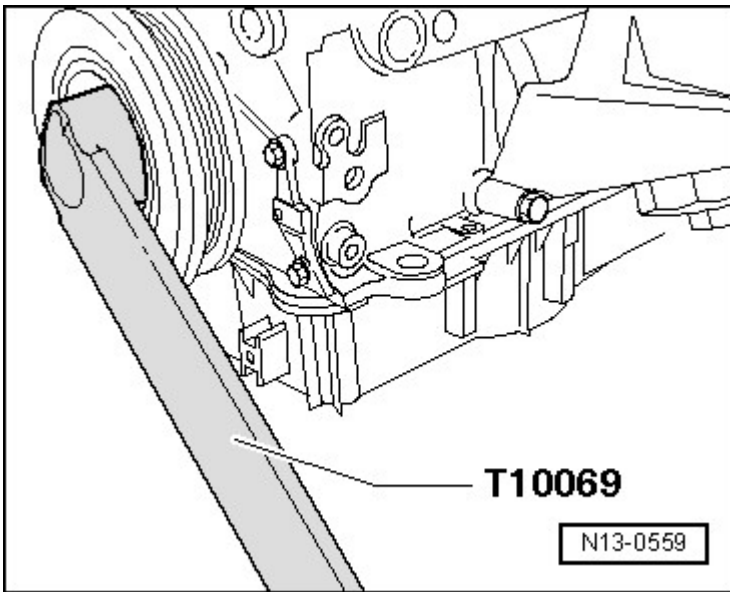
Loosening/Tightening Securing Bolt Using Counter-Holder T10069 To Hold Vibration Damper
